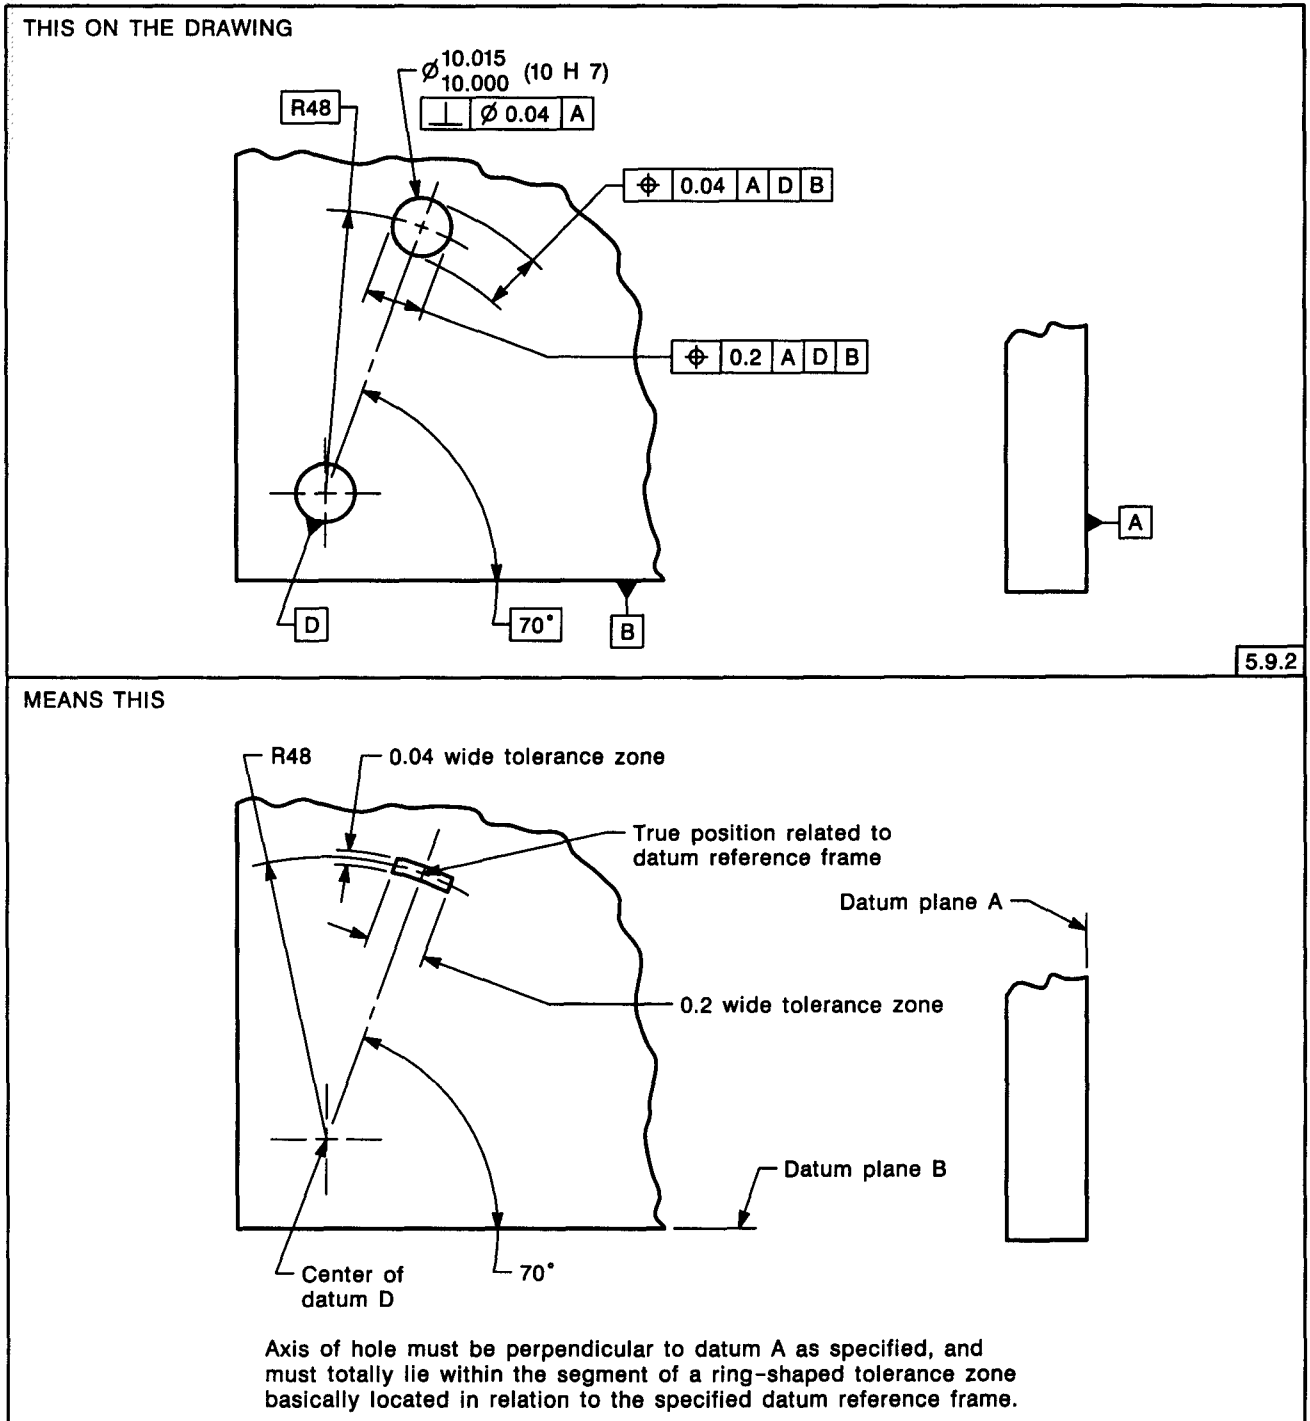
BIDIRECTIONAL POSITIONAL TOLERANCING, POLAR COORDINATE METHOD
